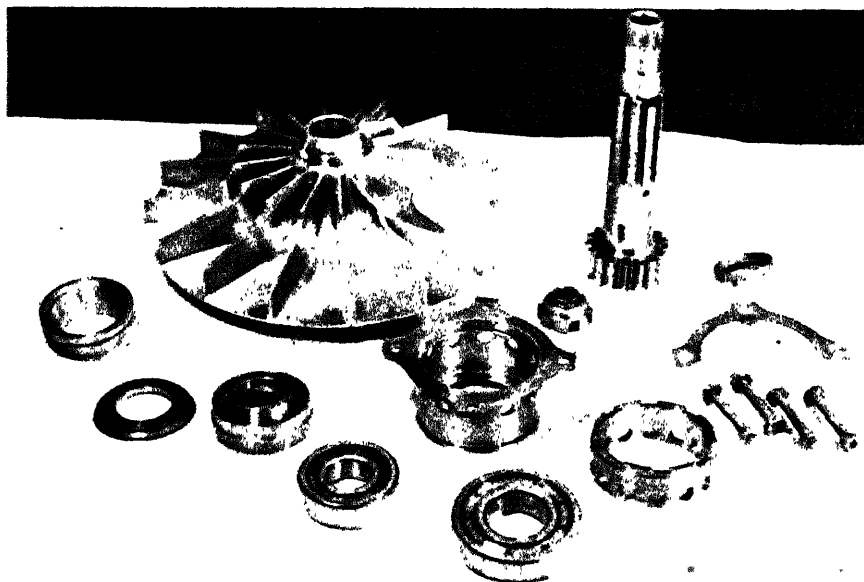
IMPELLER, SPINDLE, BALLRACES AND HOUSING, ETC.
